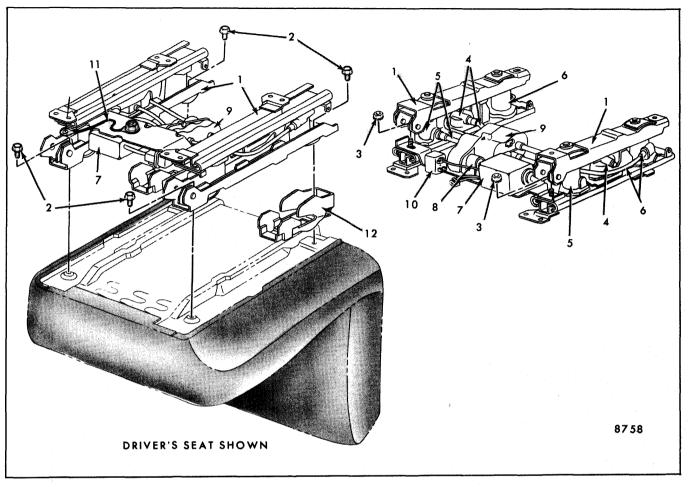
Driver's Seat Power Operated Six-Way Seat Adjusters
